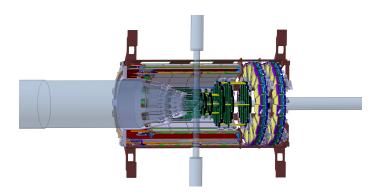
A CAD drawing of the Micro Vertex Detector.
